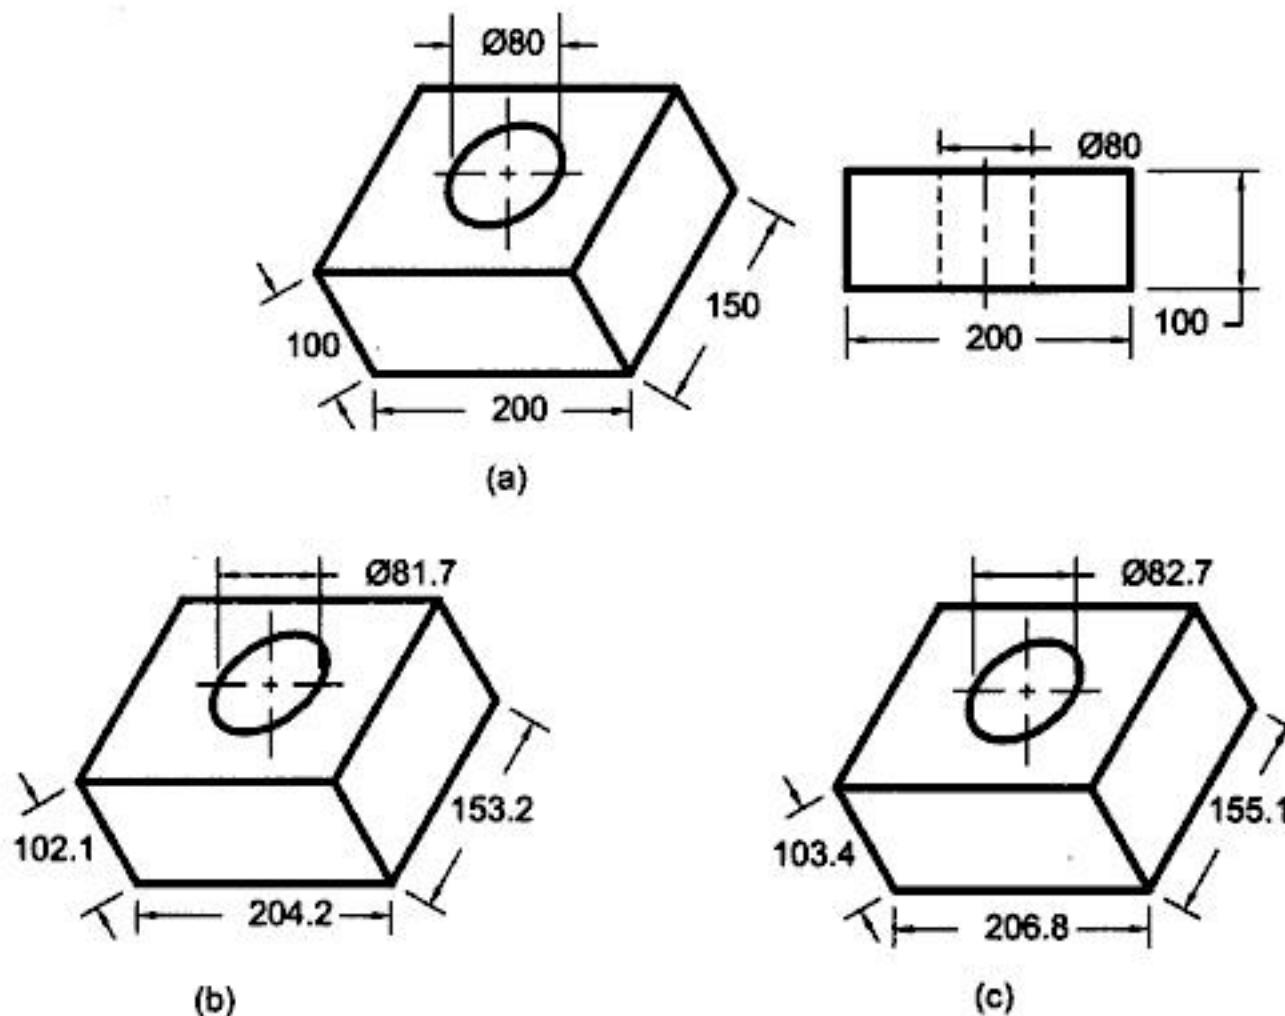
Provision of allowances for patterns in sand castings (All dimensions in mm)
